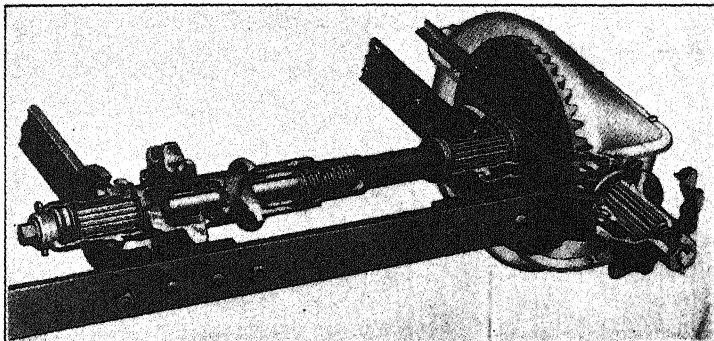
Clutch sprocket, countershaft bevel gear, and pinions.
